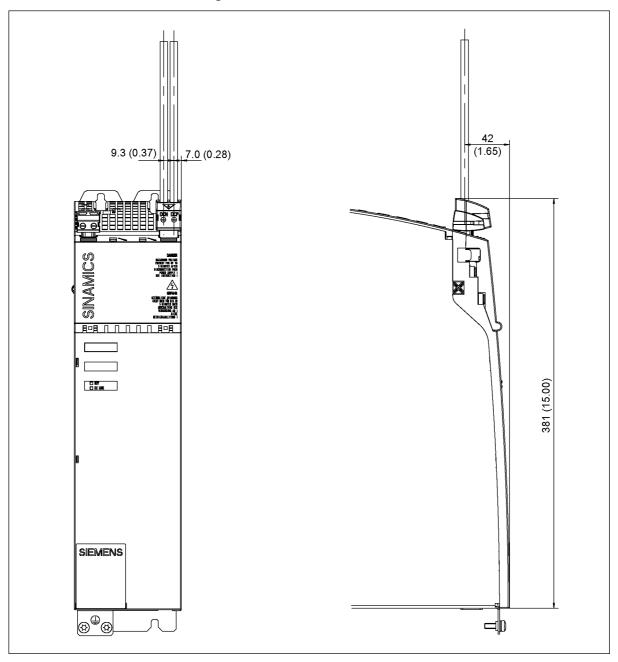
Dimension drawing, 100 mm components with DC link infeed adapter for 0.5 mm² to 10 mm²
